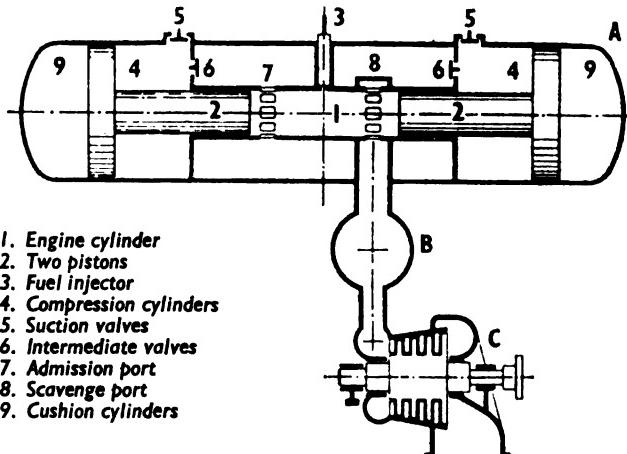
Section through the free piston gasifier, A; showing the gas collector, B; and the gas turbine, C
